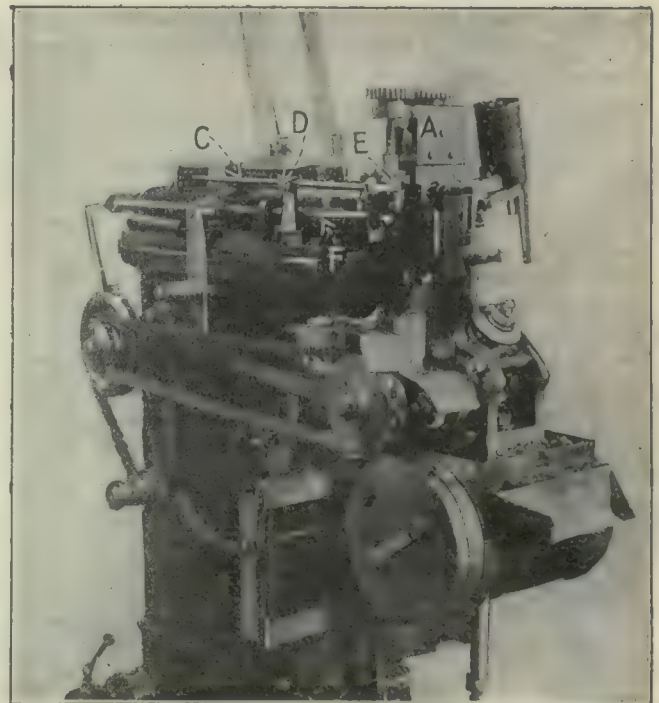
A MODIFIED SHAPING MACHINE FOR GASHING BEVEL GEARS
